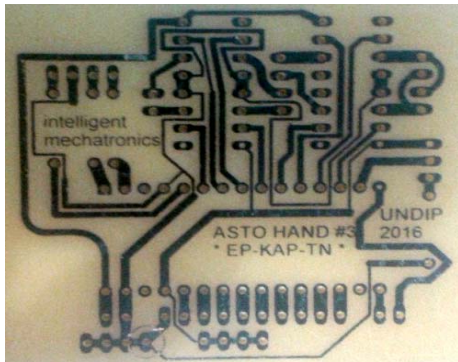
Designed Printed Circuit Board (PCB) for wearable robot
